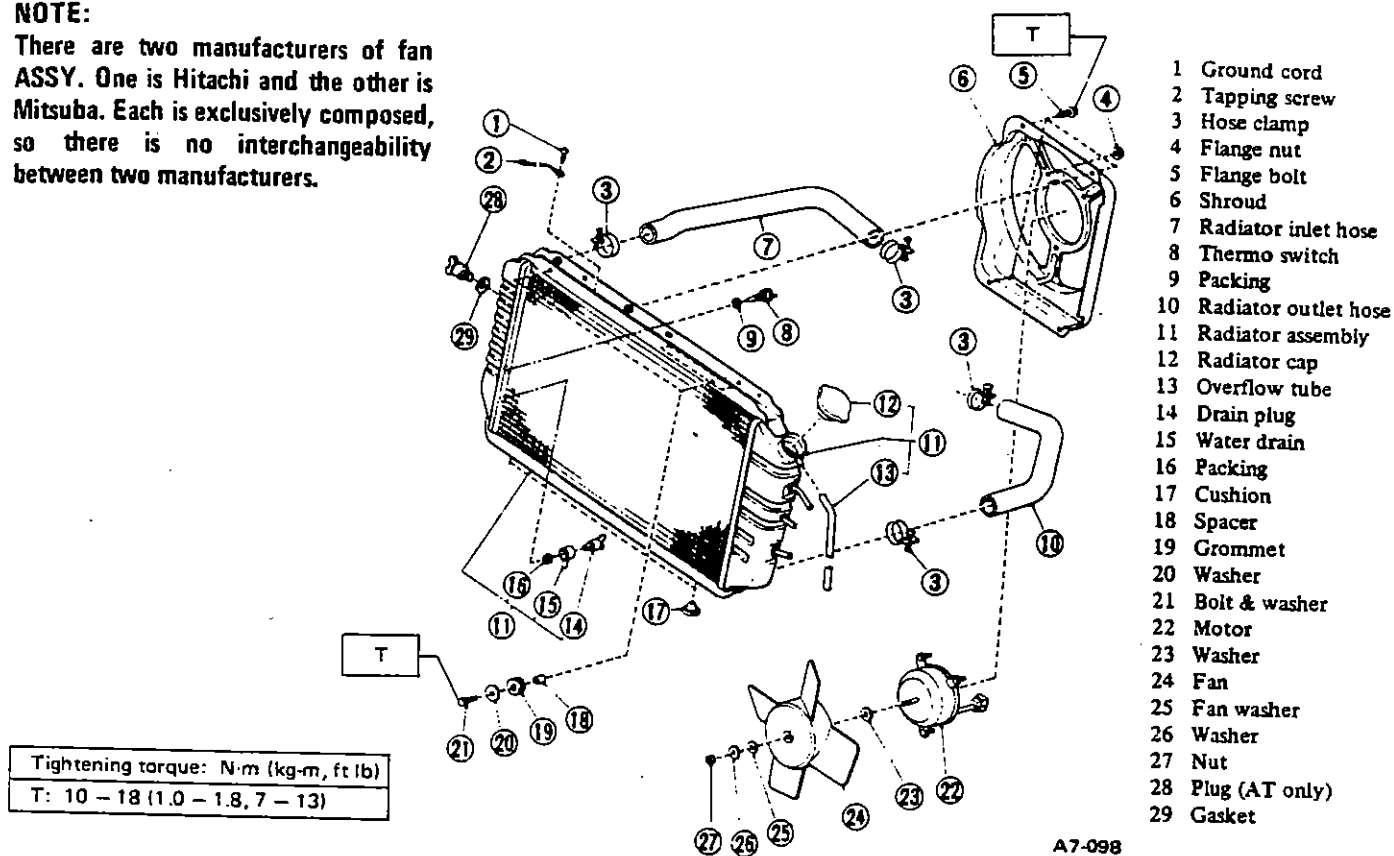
Engine cooling system (Radiator ASSY and electric fan)
